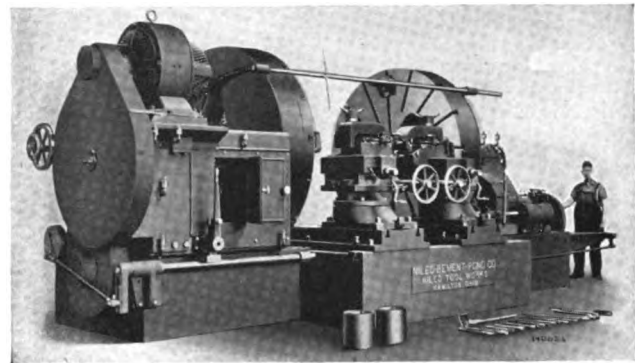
80-90-Inch Heavy Driving Wheel Lathe
